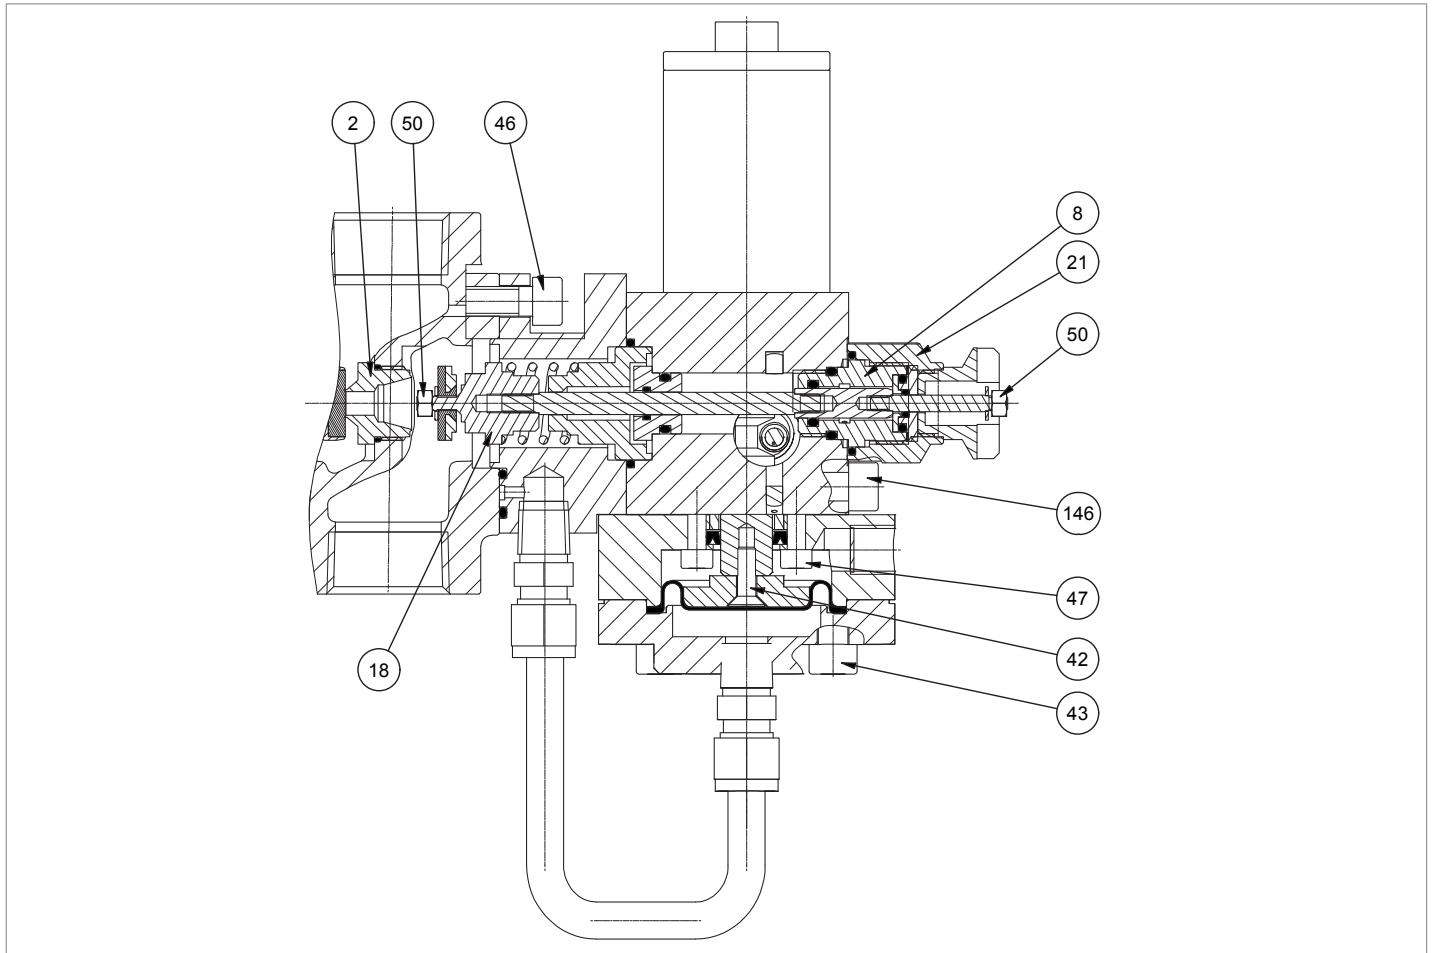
SB/518 built-in slam-shut valve tightening torques
